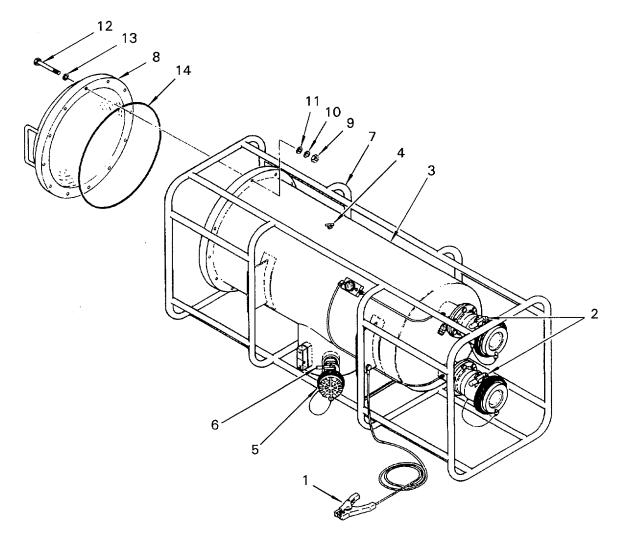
Filter Vessel Cover O-Ring Replacement
